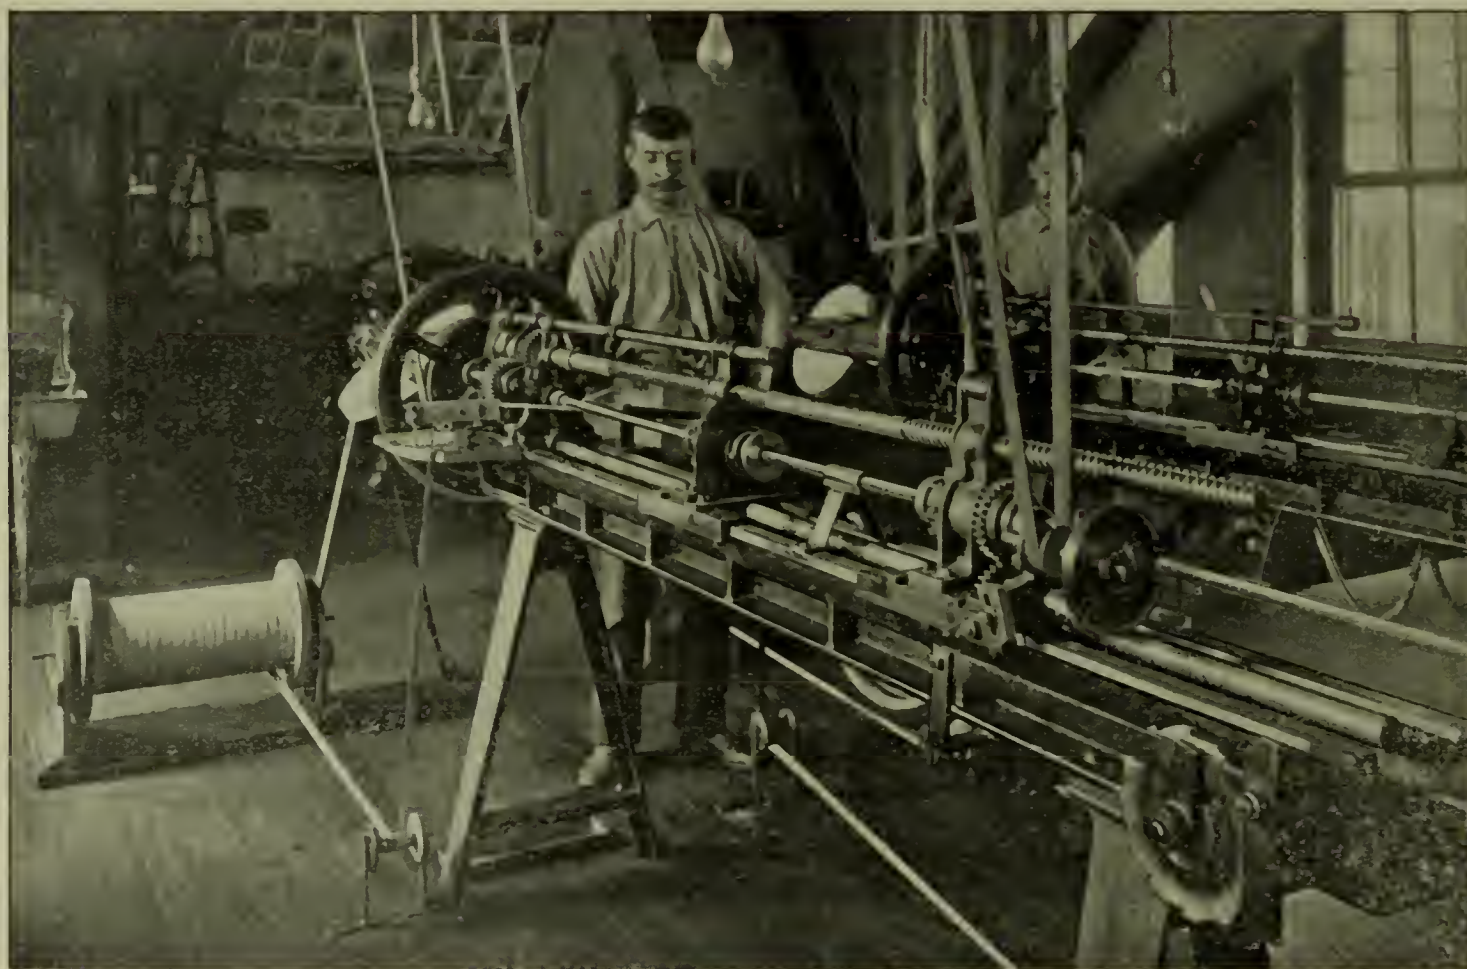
MACHINE FOR MAKING PAPER TUBES.
